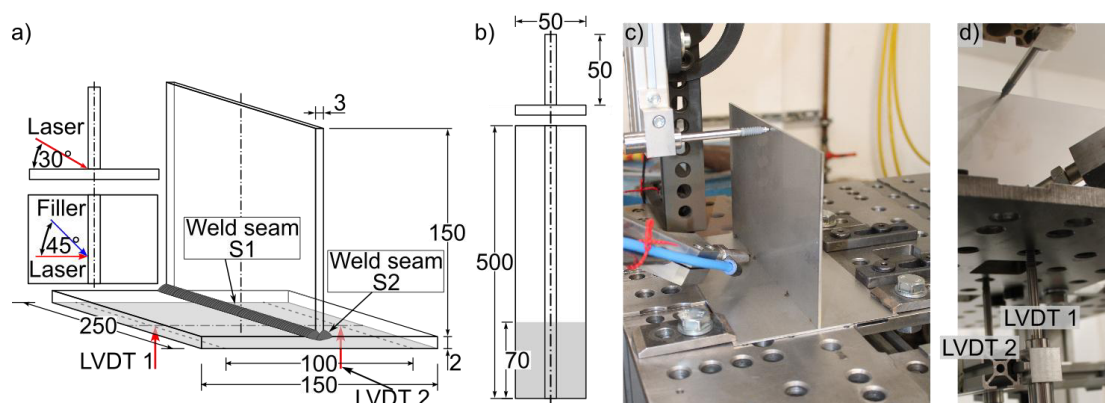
Component geometry of the distortion samples (a), sample geometry for corrosion testing (b), setup with clamping fixtures and LVDT positions (c and d).
